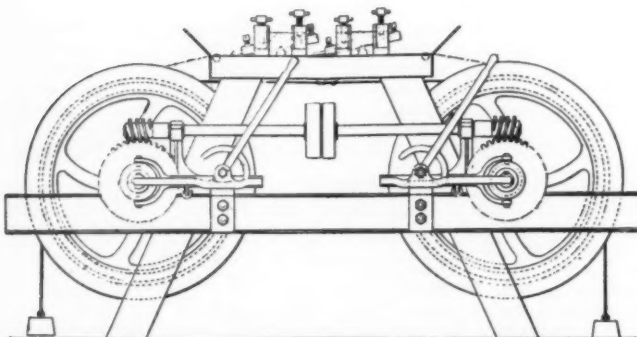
MULLER MACHINE AS IMPROVED BY MARTI
